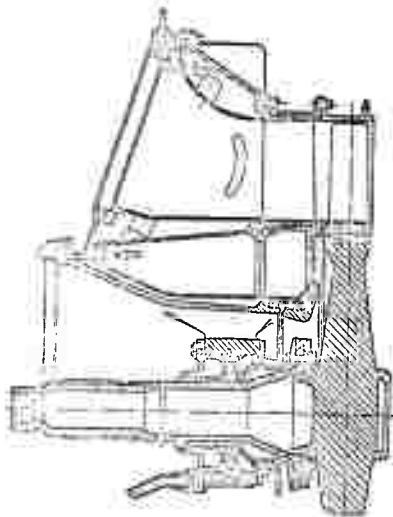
Diagram of a single-stage turbine for a turbojet engine.
